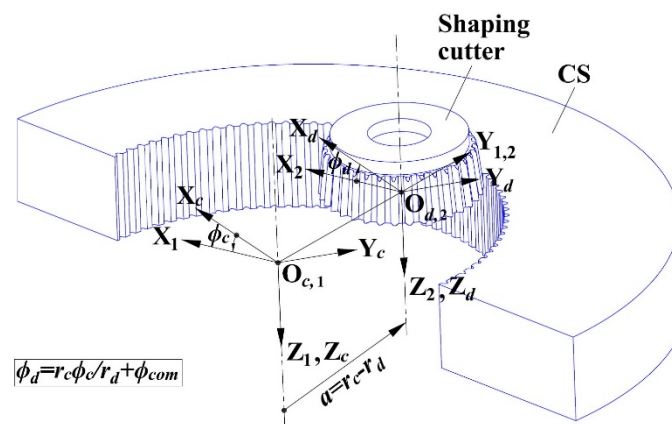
The shaping process by using a spur shaper cutter to produce a CS.
